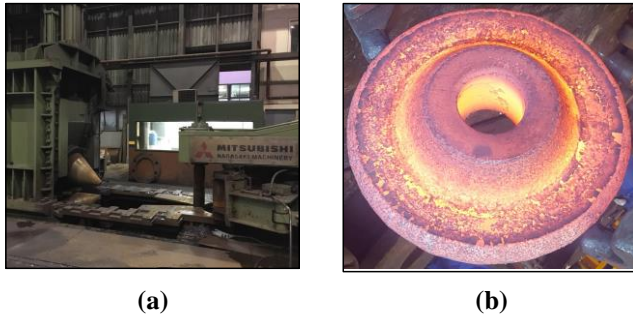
Experimental equipment and blank used in On-line; (a) \emptyset 3000 ring rolling mill machine, (b) initial blank
